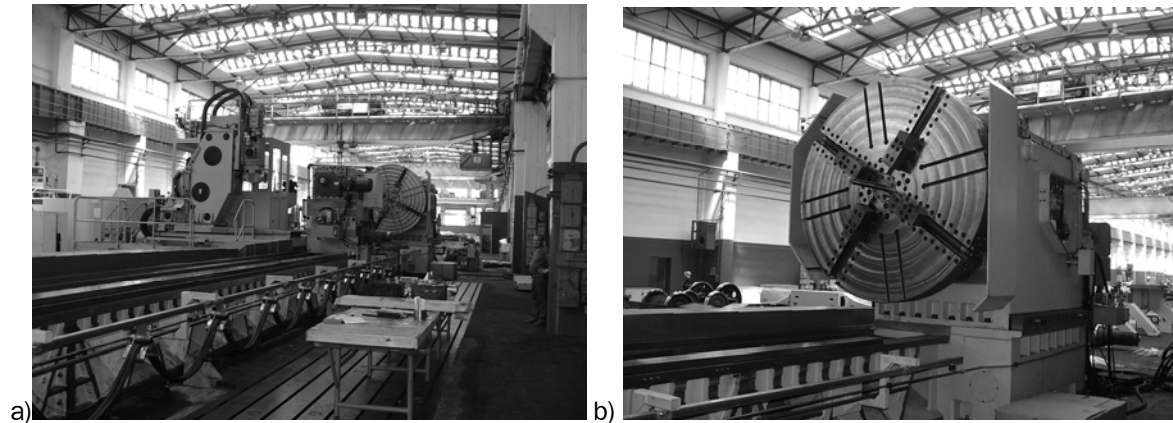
TV 240 CNC machine tool view (a – general view; b – turning holder)
